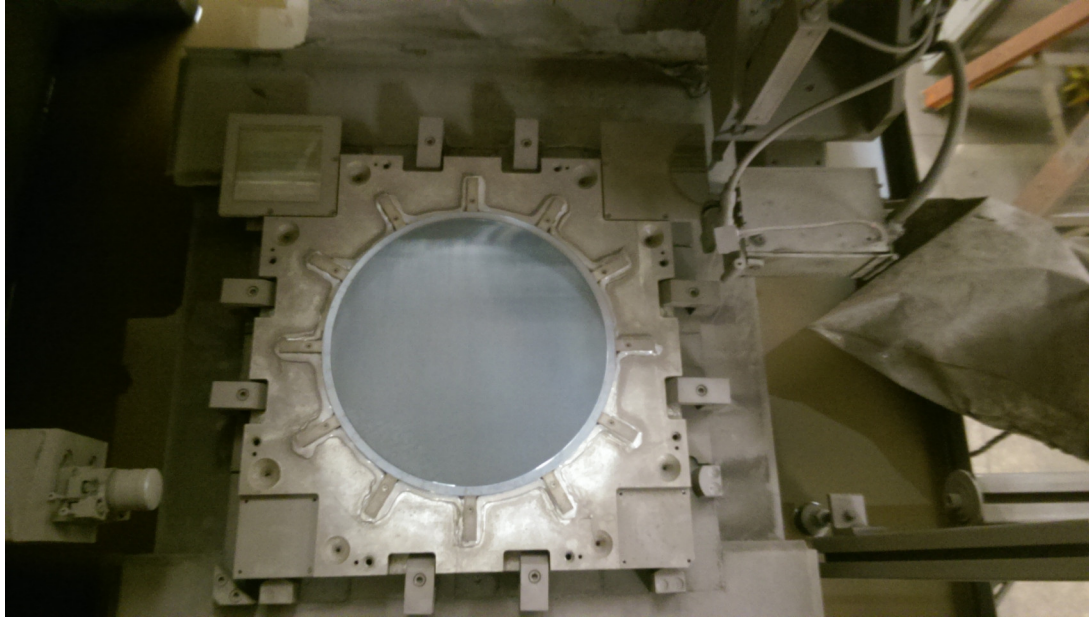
The fixturing mounted on the machine and holding a lens.
